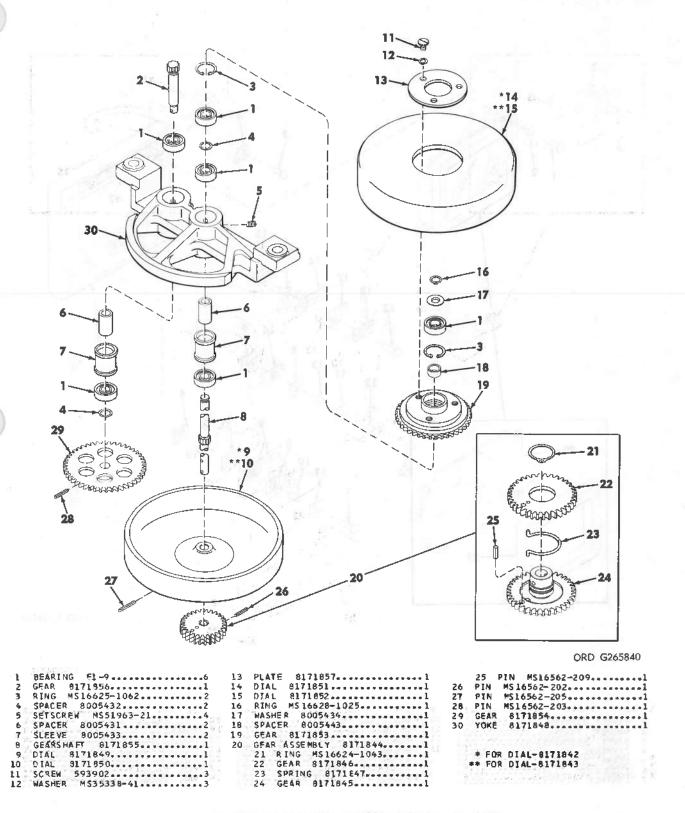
BEARING ASSEMBLY /8171778/-EXPLODED VIEW /SEE FIGURES 35 AND 56 FOR NEXT HIGHER ASSEMBLY/
